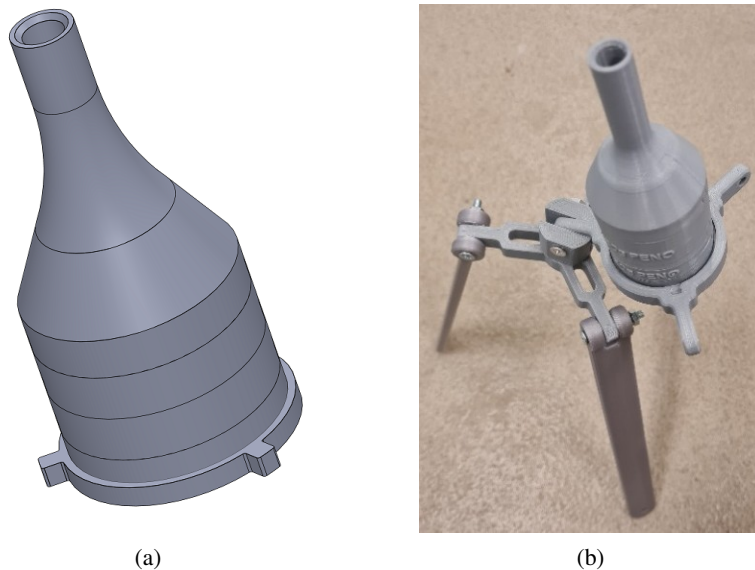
The concept of the EFP casing and 3D (a) printed prototype (b)
